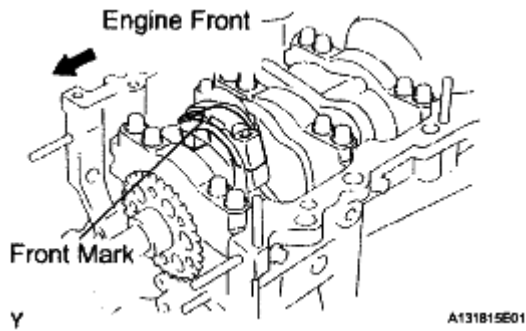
Checking Front Mark Of Connecting Rod Cap
